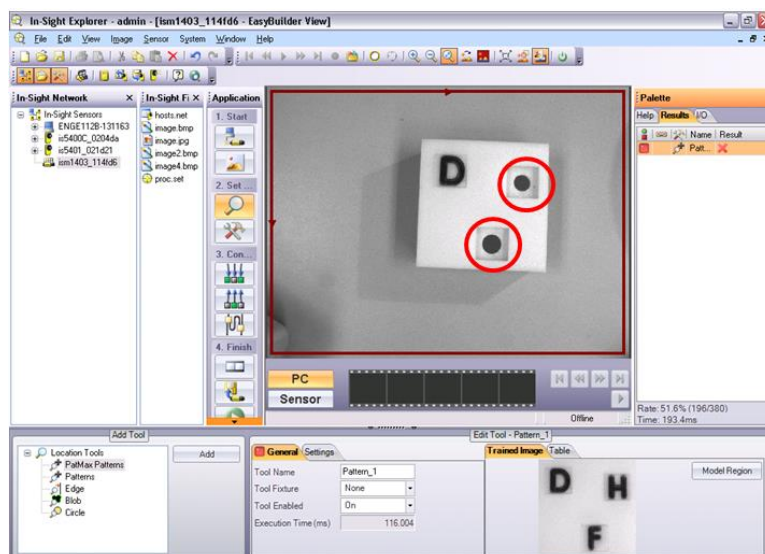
Machine Vizion System Defective New Assembly Base using PatMax Pattern (Missing 2 Components)
